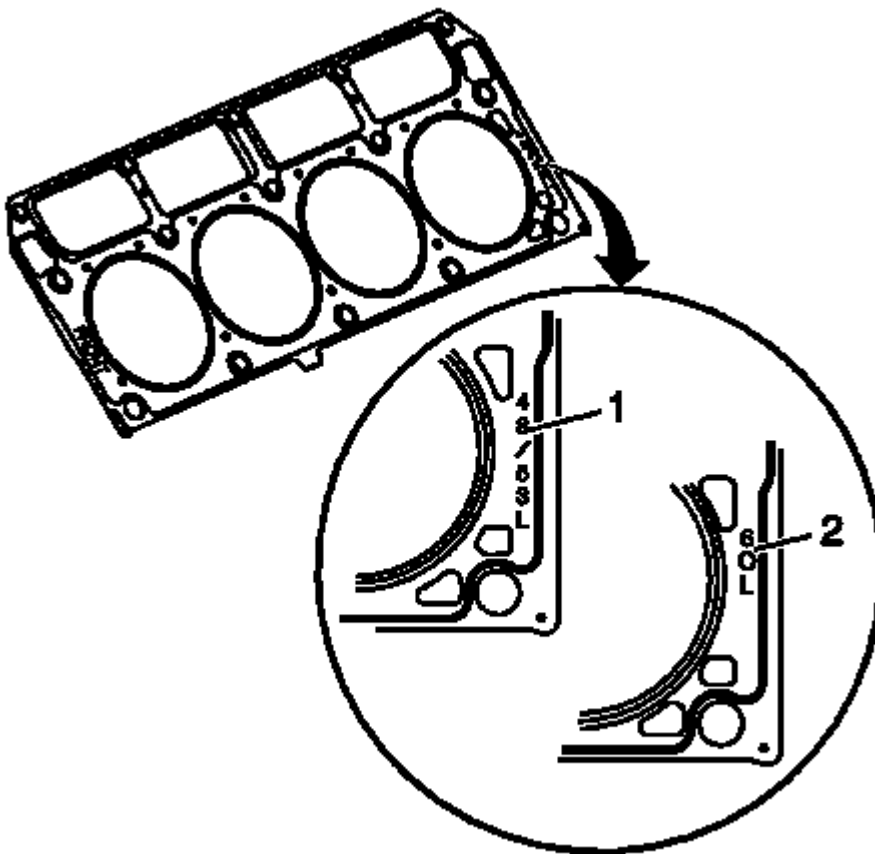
View Of Cylinder Head Gasket Displacement Markings
